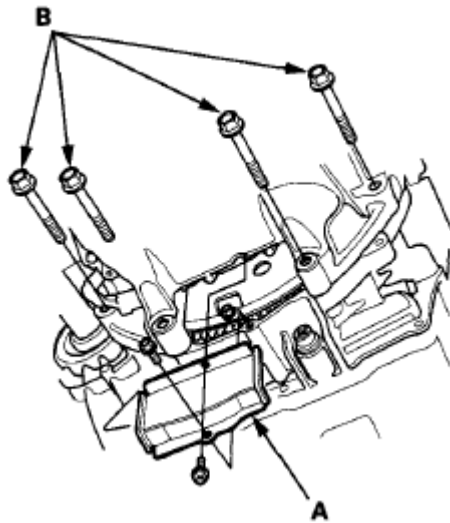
Removing Torque Converter Case Cover And Four Bolts
